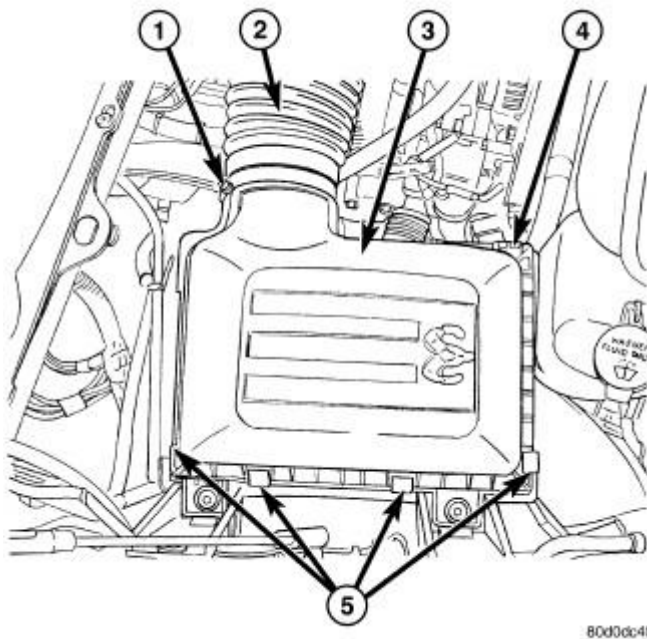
Air Cleaner Housing Cover, Air Duct & Fasteners
